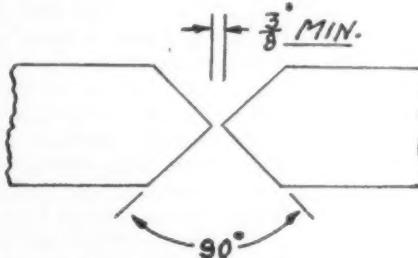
The break should be chipped to a 90-degree angle for welding.
